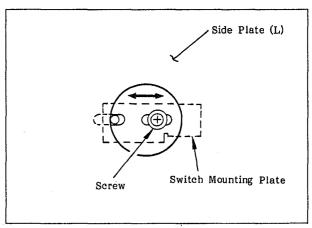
Adjusting the Position of the Cassette UP Switch
